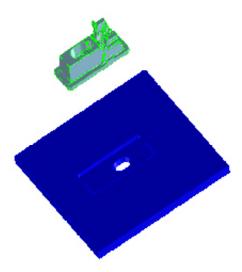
Illustration of base plate mounting features for ADNS-6130-001 laser mouse trim lens.
